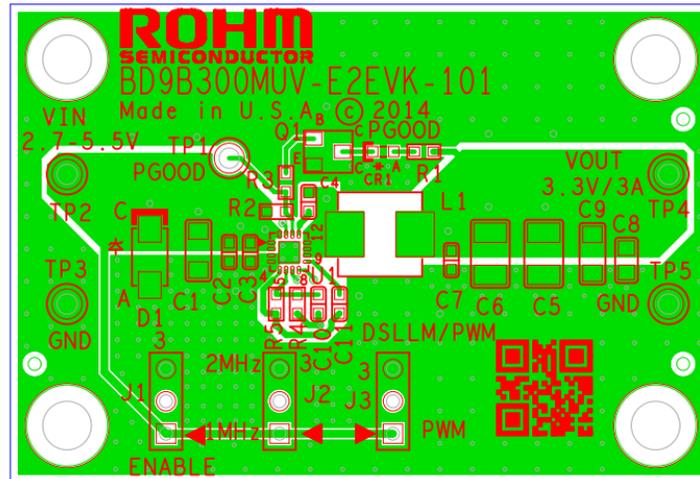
BD9B300MUV-E2EVK-101 Board PCB layout
